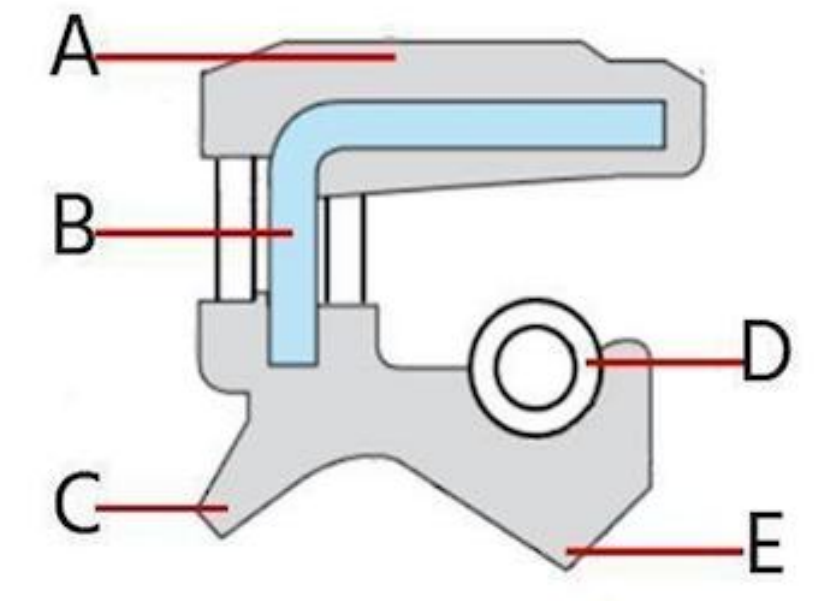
Basic Cross-Section Design of a Rotary Shaft Seal (Kolstad, 2024)
